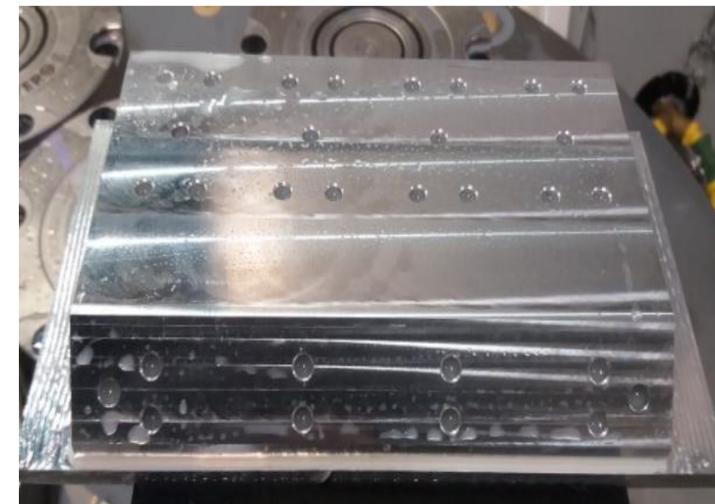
Side panel to support solenoids in 5 Axis Spinner.
